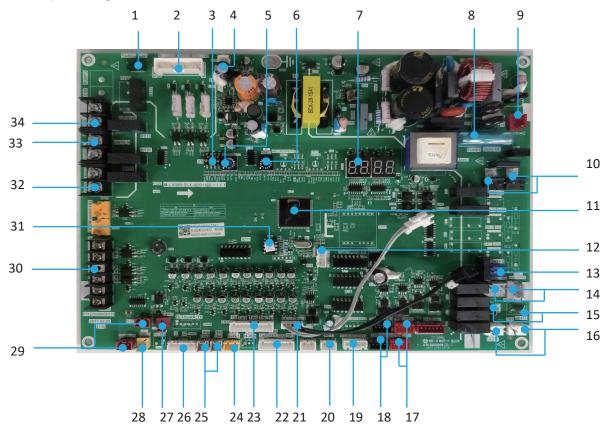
Main PCB of MC-SU30-RN1L and MC-SU60-RN1L
